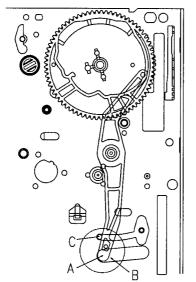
ASSEMBLY OF THE CAM GEAR & RELAY LEVER
